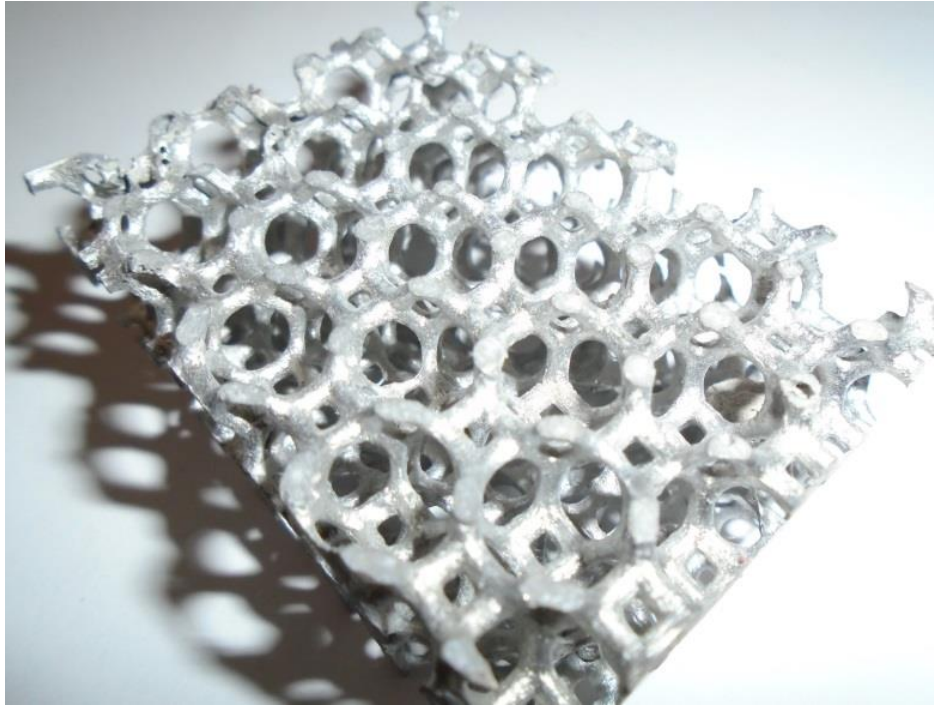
Periodic aluminum foam manufactured using 3D printing mold
